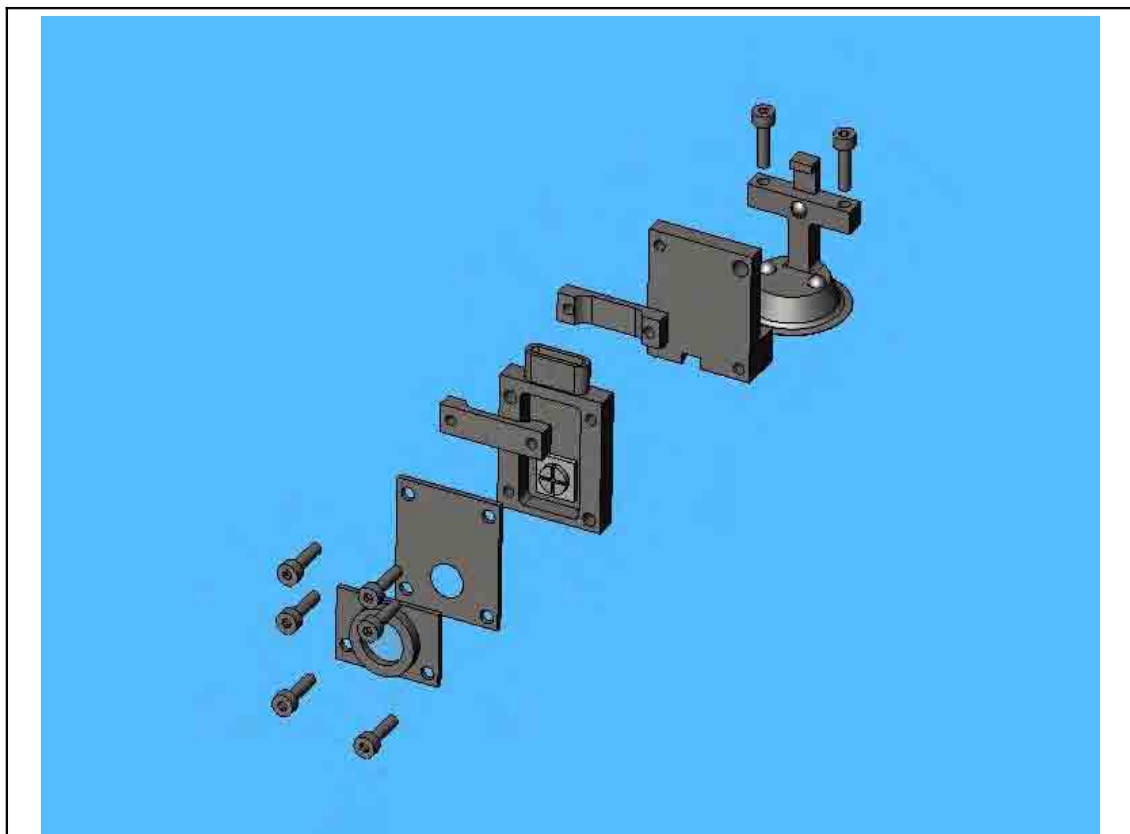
Exploded View of Proto-Flight Model Photodiode Mount Design
